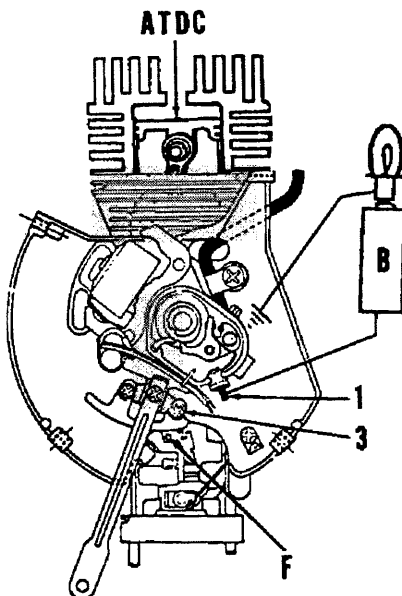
View showing speed controls and points of adjustments for motors with fuel inlet located on cover plate and breaker point magneto. Piston position (ATDC) should be set as described in Fig. E2-9.
